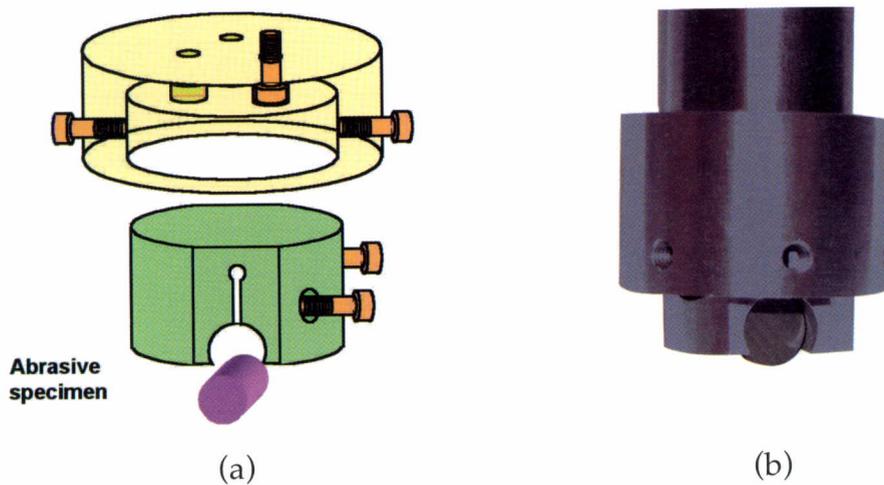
(a) Schematic diagram of abrasive pin, holder and coupling; (b) Assembly of abrasive pin, holder and coupling.
